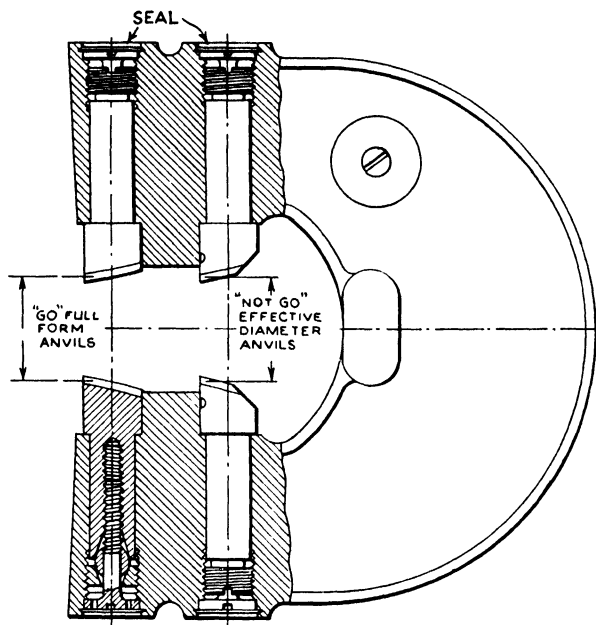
ADJUSTABLE TYPE THREAD GAUGE OF WICKMAN TYPE
